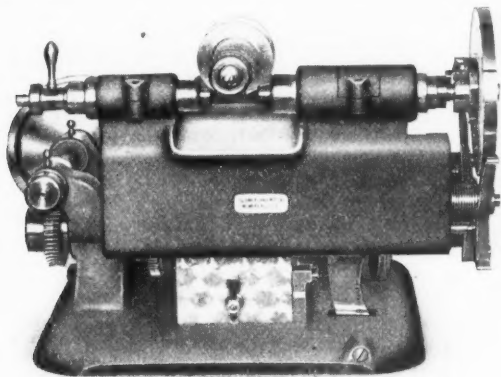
The Sloan & Chace Automatic Precision Pinion-cutter, arranged for taking Three Cuts through Each Tooth.
